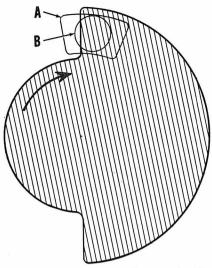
The rotary valve opening begins when passage in crankcase (A) and passage in rotary valve cover (B) are both uncovered. Round port openings such as shown at (B) cause more gradual opening and closing than square port as shown at (A).
